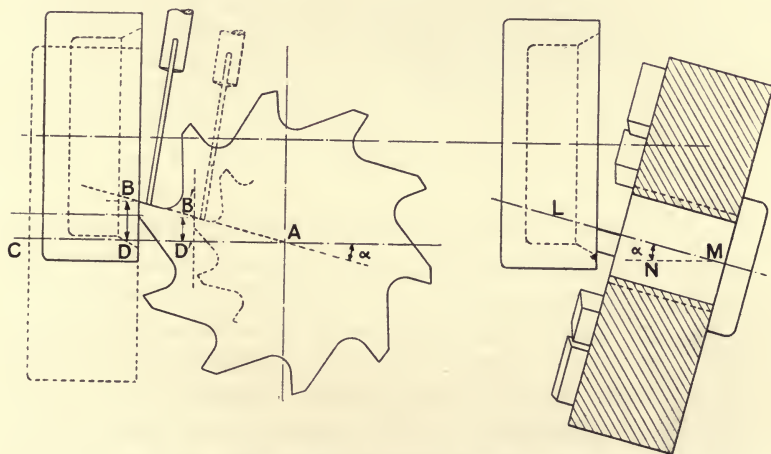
SETTING FOR CLEARANCE WITH CUP WHEEL
